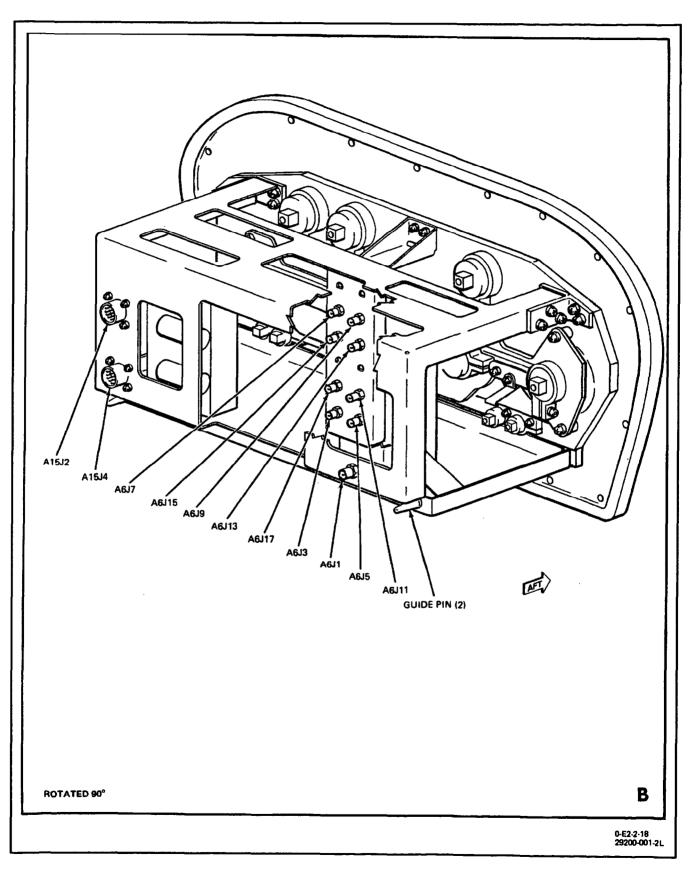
Removal and Installation of Antenna Assembly AS-3495/ALR-73 (Sheet 2)
